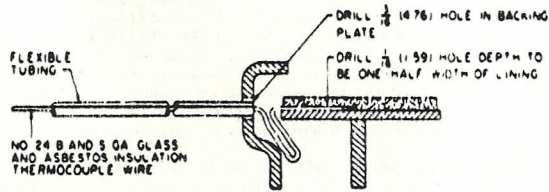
A—DRAWING OF THERMOCOUPLE LOCATION—DRUM BRAKE
